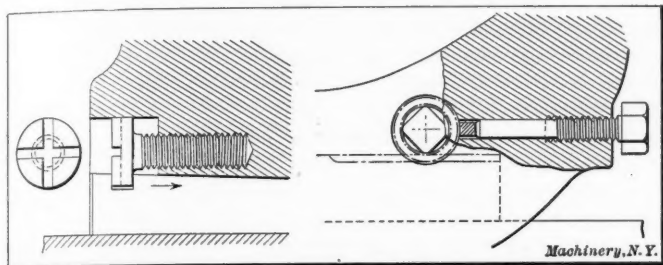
Detailed View of the Adjusting Arrangement shown to the Left in Fig. 40. Fig. 42. An Unusual Arrangement: Taper Strip Adjusted by Rack and Pinion
